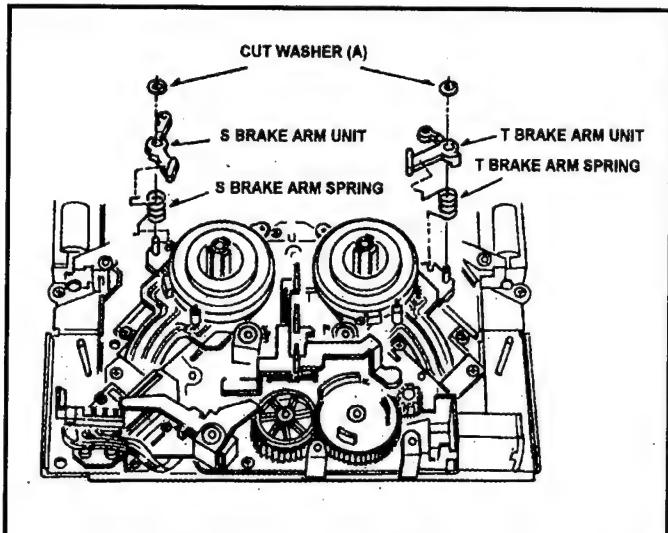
Removal of S & T Brake Arm Unit
